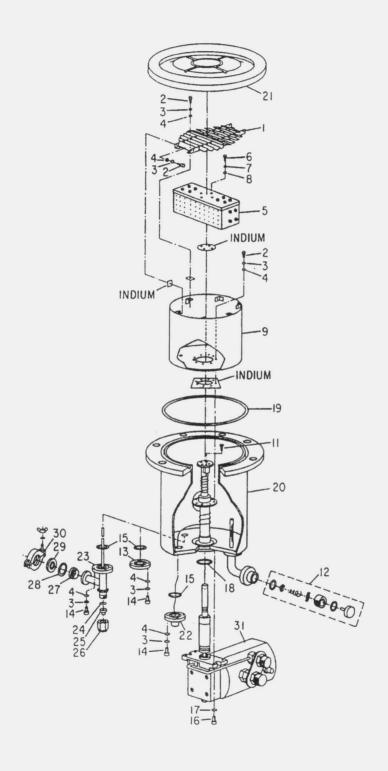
Exploded View of Cryo-Torr 7 Cryopump
